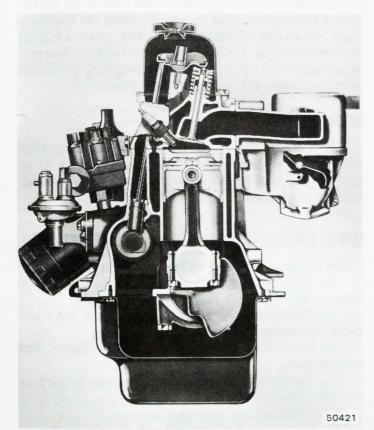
B-66 Six-Cylinder Engine Assembly—Sectional View
